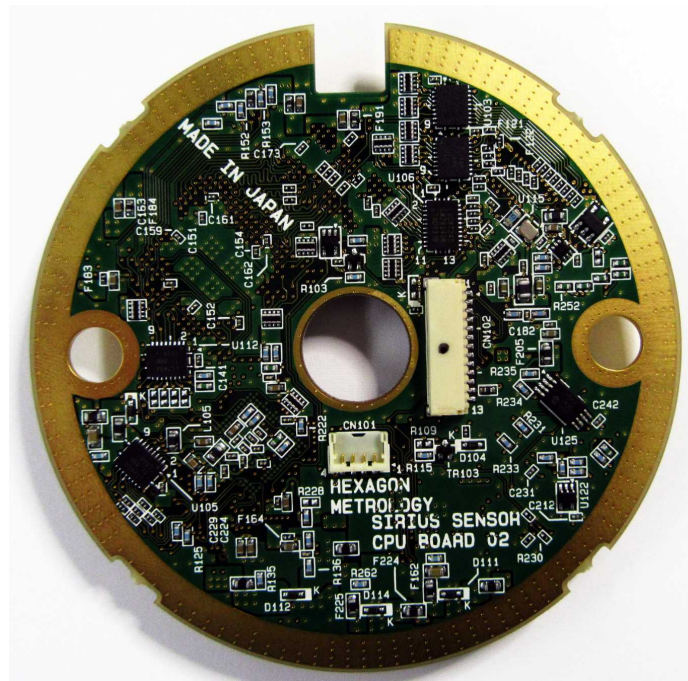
DS-SENSOR-B0110-01_PCB_Photo_SolderSIDE
